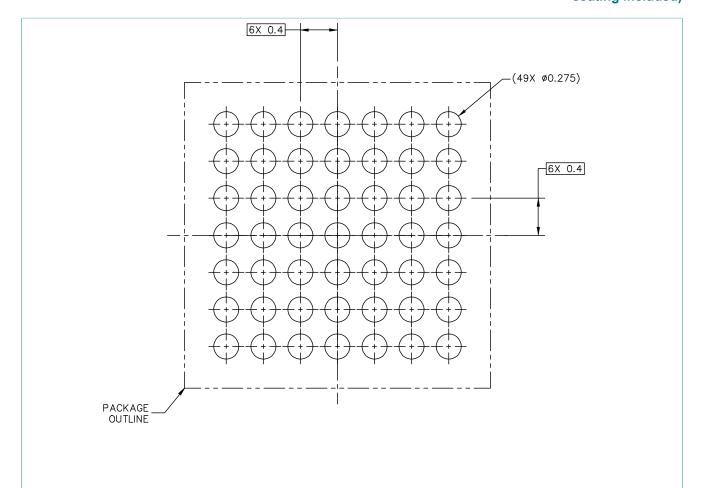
Reflow soldering footprint part2 for WLCSP49 (SOT1444-11)
